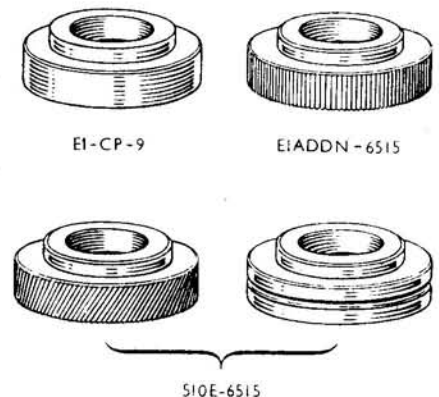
Views of the different exhaust valve spring spacers used. Latest spacer (part No. 510E-6515) is identified by diagonal knurling or by groove. Spacers without knurling or groove (part No. E1-CP-9) are used with small diameter spring. Spacers with straight knurling (DDN-6515) are no longer used.
